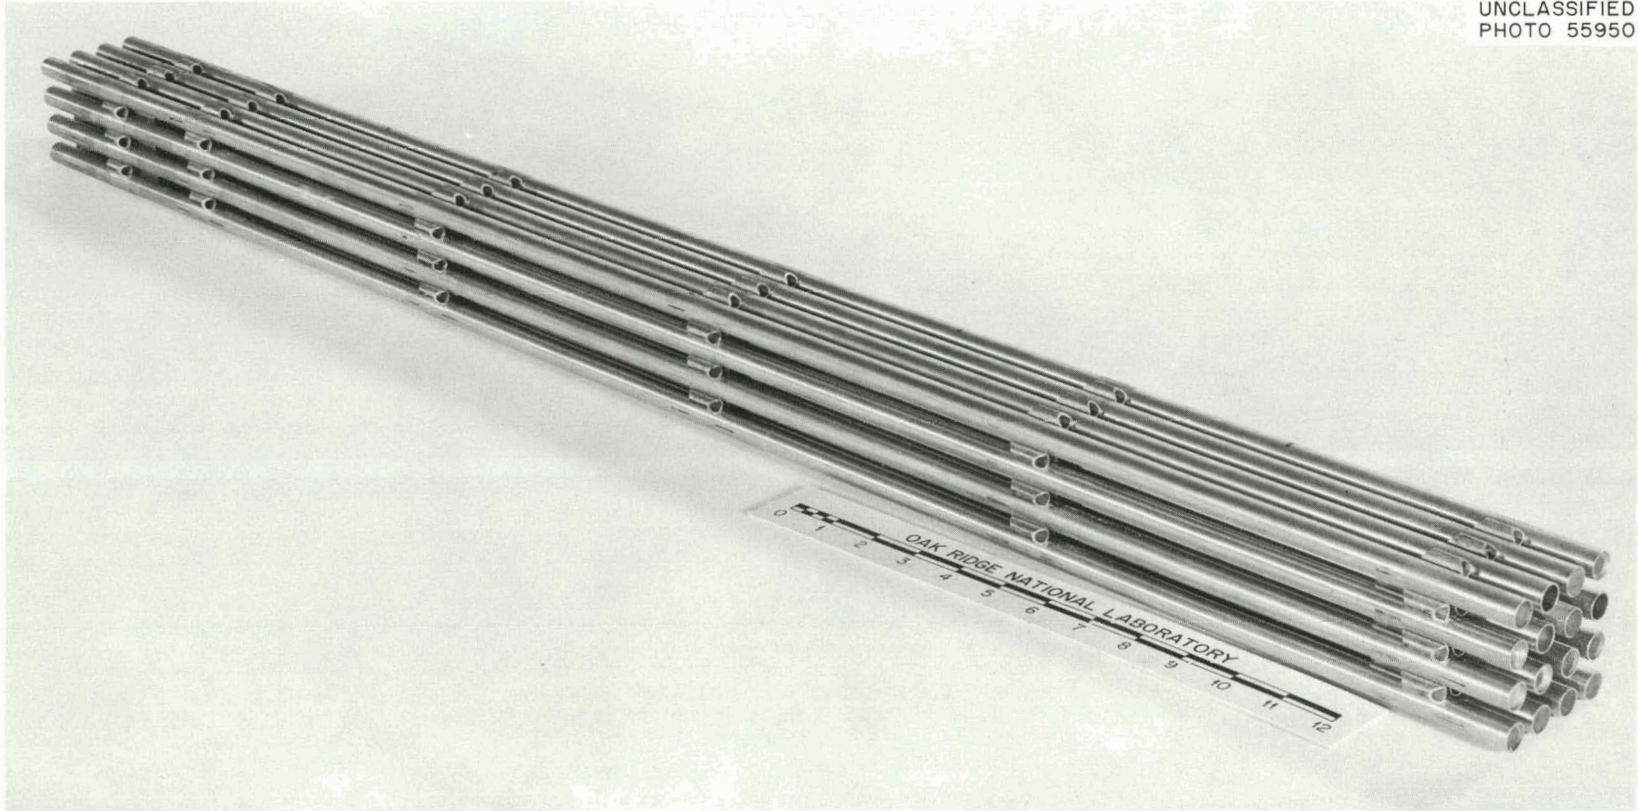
As-Brazed Prototype Fuel Bundle for Irradiation in VBWR.
